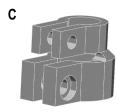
shows a CAD illustration of telescopic clamp. The clamp is a two-sided clamp, with one side being adjustable by a lever while the other is meant for permanent attachment after assembly. The lever can be flipped to fixate and loosen the telescopic clamps and the permanent attachment is achieved with a nylon bolt and nut. Since the clamp is 3D printed, separate rods need to be ordered. Flexinplex kunststoffen B.V. [27]\_offers PMMA tubes which can be cut into custom lengths by the company for a small additional cost. The diameters are chosen to ensure sturdiness, but also ensure that the rods can perform their telescopic function, meaning enough friction when the clamp is in the closed position and no friction when the clamp is in the open position. To ensure no friction in the open position, it was decided to have a ~1 mm discrepancy between the inner diameter of T2 and the outer diameter of T1. For T1 a diameter of Ø25 -21mm was selected and for T2 a diameter of Ø20-16mm was selected.
